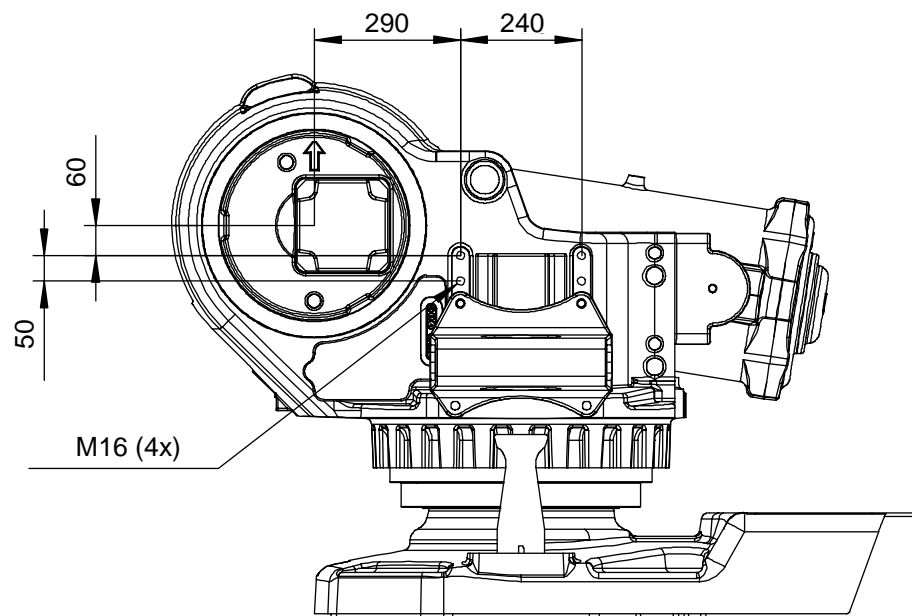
Holes for mounting of extra load on the frame, and for mounting of fork lift device (dimensions in mm).
